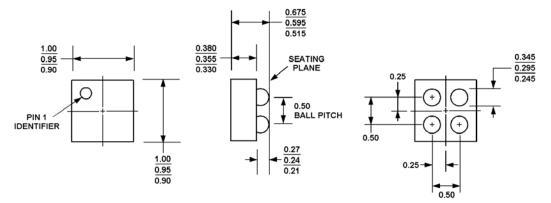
4-Lead Wafer-level Chip Scale Package Dimensions shown in mm
